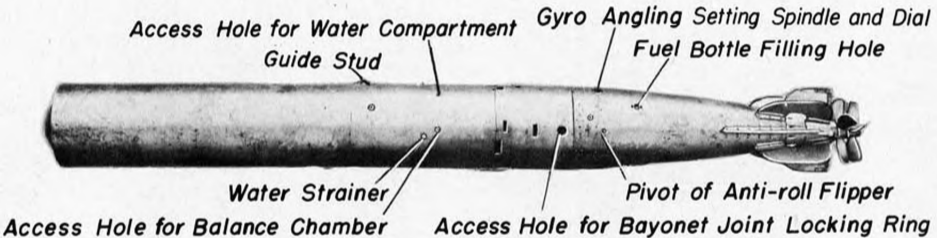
Torpedo Type 91 Mod 2, Warhead Removed
